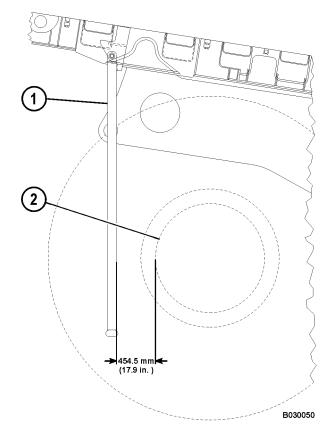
ROCK EJECTOR INSTALLATION 2. Wheel Housing
